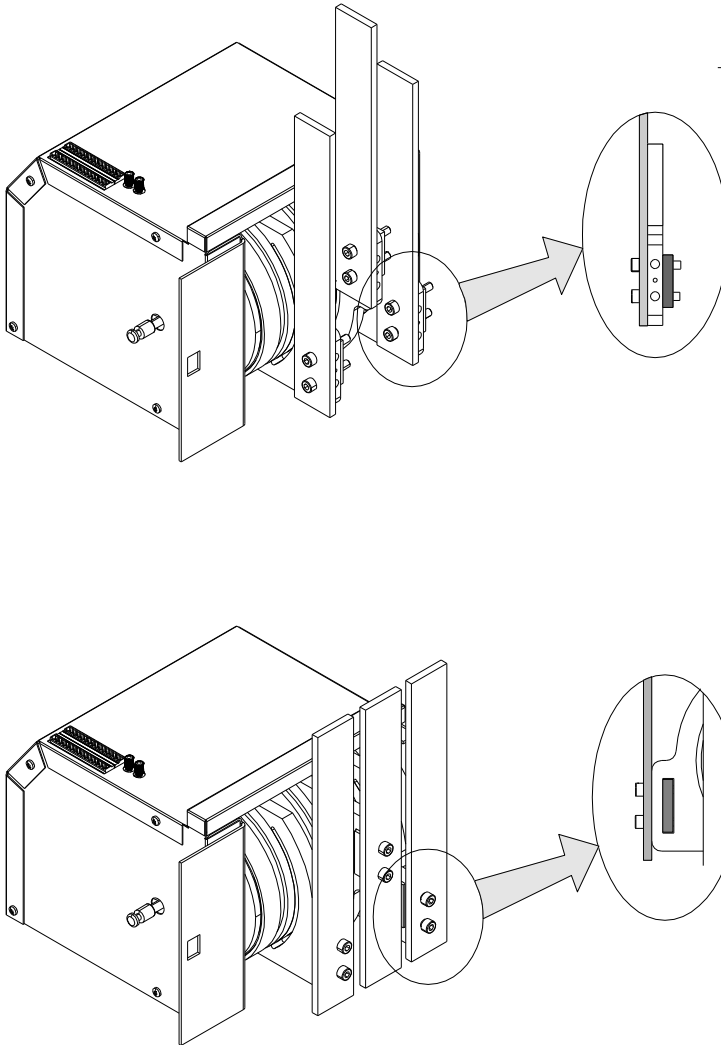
AQ1000 installation picture – bus bar mounting alternatives.
